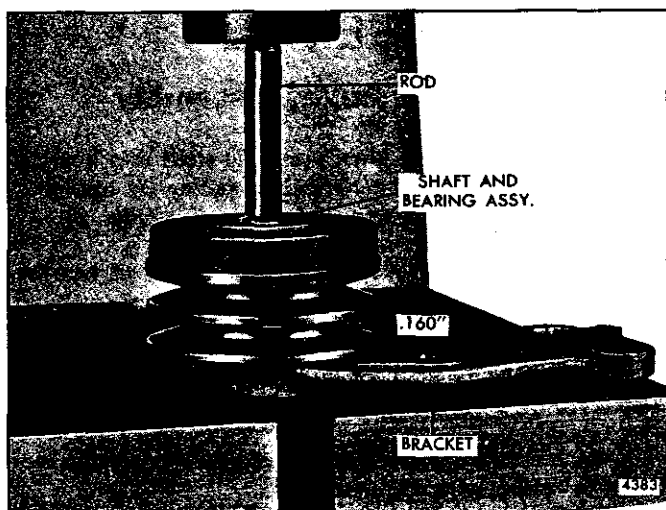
Installing Shaft and Bearing Assembly and Pulley in Bracket
